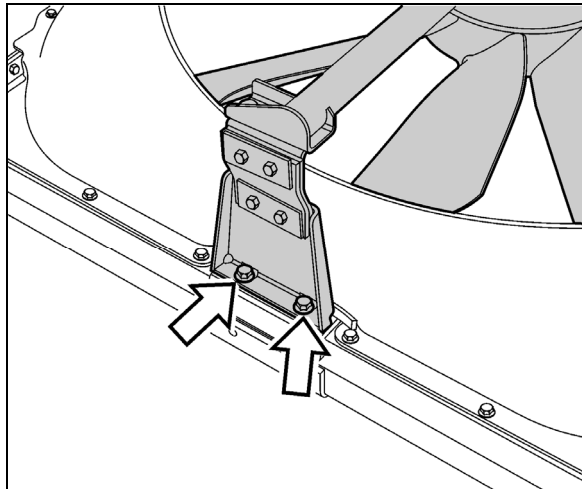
REMOVING UPPER FAN DRIVE SUPPORT BRACKET
